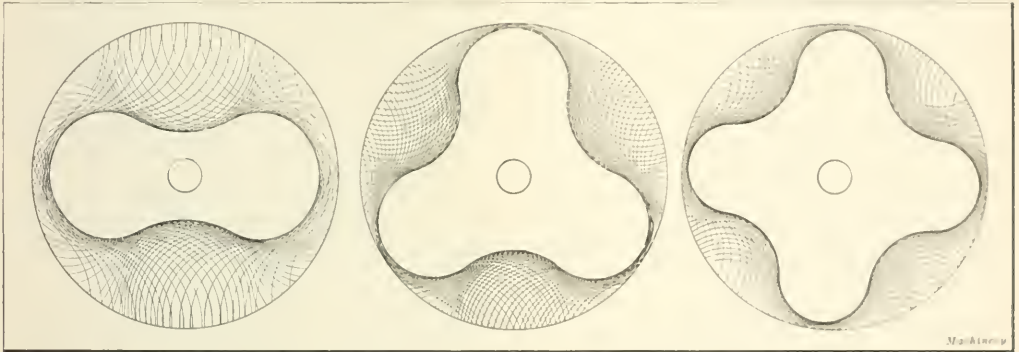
Master Form for developing a Three-tooth Impeller of 4 inches Pitch Diameter
